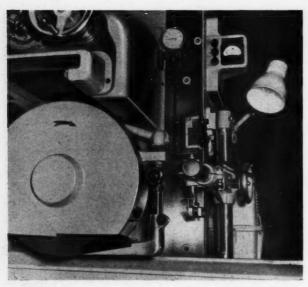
The automatic cycle of the type 3722 surface grinder is controlled by means of this gauging unit, which is mounted on the side of the column, and can be adjusted both vertically and horizontally
